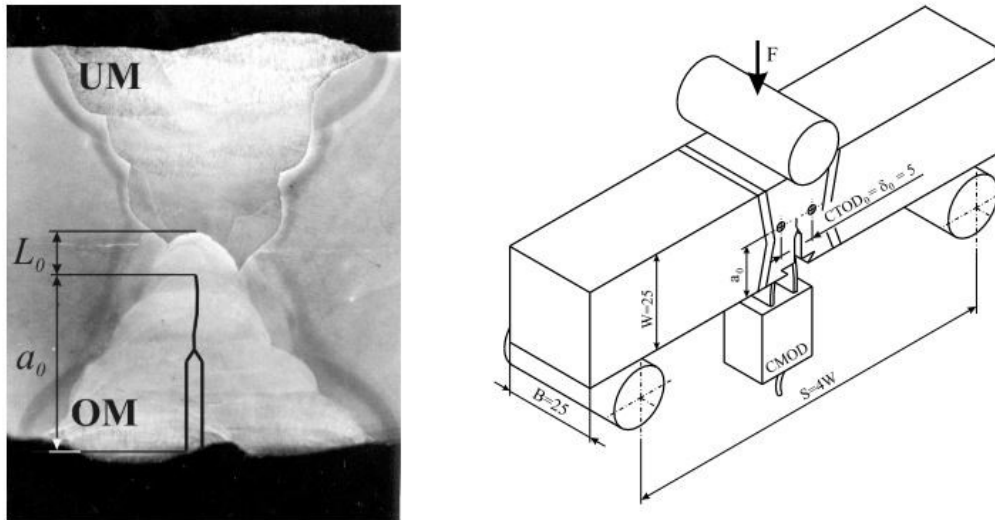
An example of fabricated double mismatched welds with corresponding mechanical properties of the BM, the OM weld and the UM weld materials. A configuration of the SE(B) specimen for fracture testing of such welds is shown as well (source: [67]).
